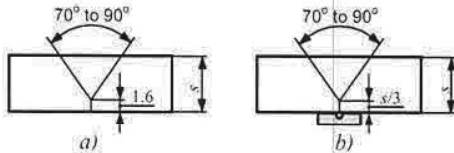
Preparation of weld seams: a) with TIG procedure for material of thickness 6 mm; b) in the MIG process for a material thickness of ≈ 6 mm [16]
